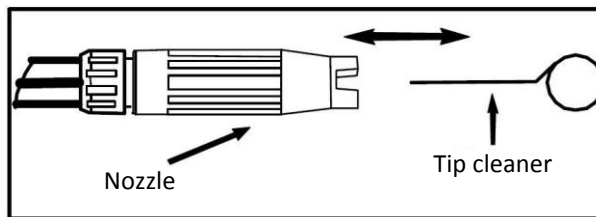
Insert tip cleaner in nozzle hole and move back and forth until debris is dislodged
